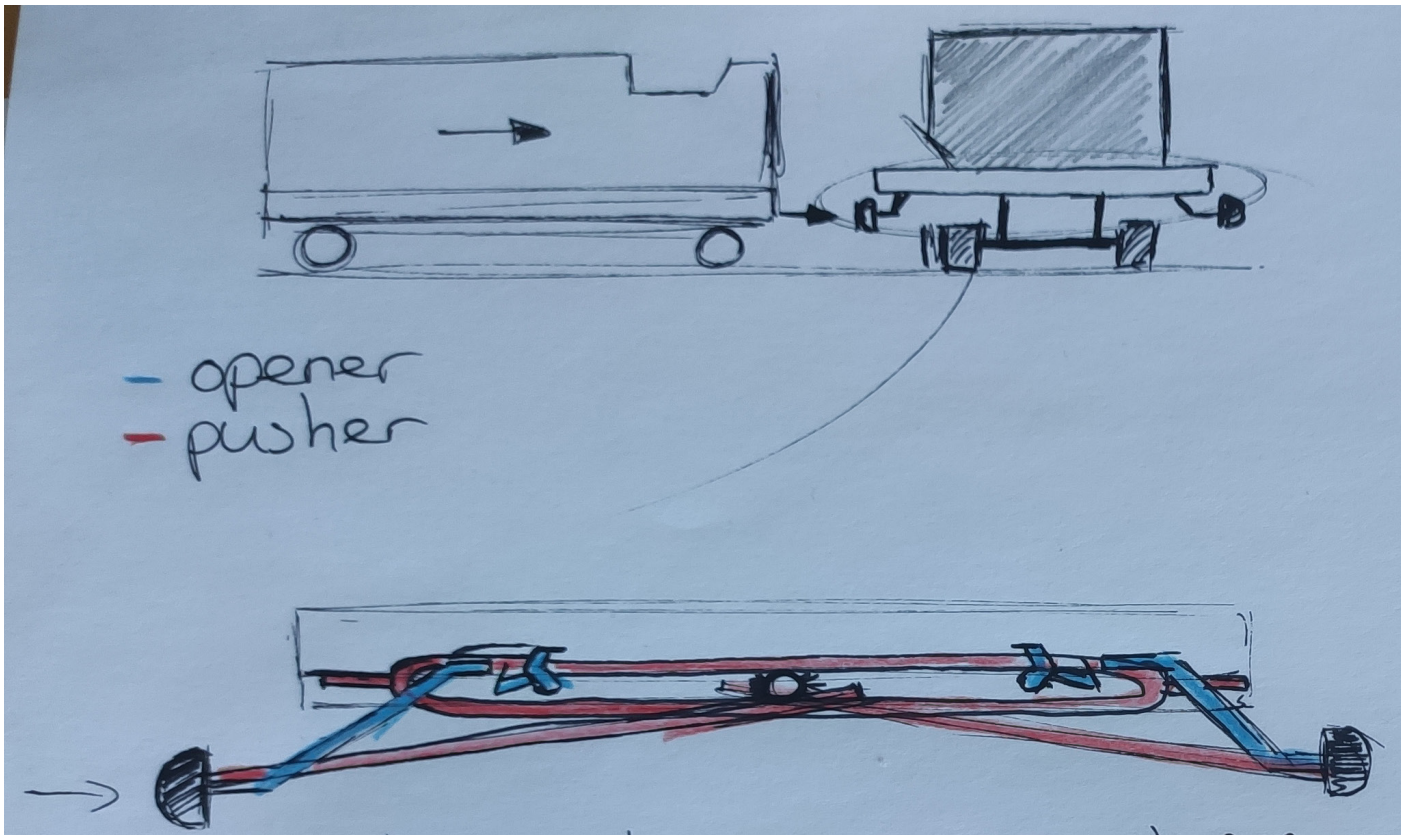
The push bar is fitted on both sides of the dolly . Multiple rods make it possible to open the lock and activate the push mechanism. The locks open and the pin pushes on the back of the container when the transporter drives against the bumper
